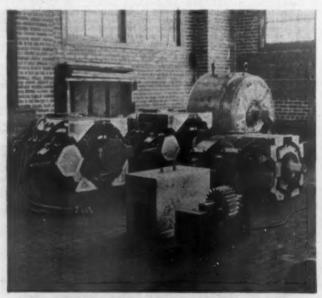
Motors with all openings covered with paper and tape ready for shipment to outlying points—In the foreground is shown an induction-type pinion heater with a cover for reducing the time of heating
